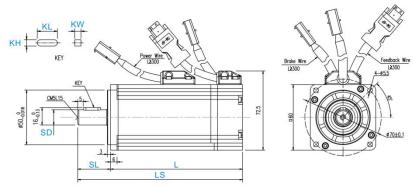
Dimensions of 60 Flanged Brake Motor
